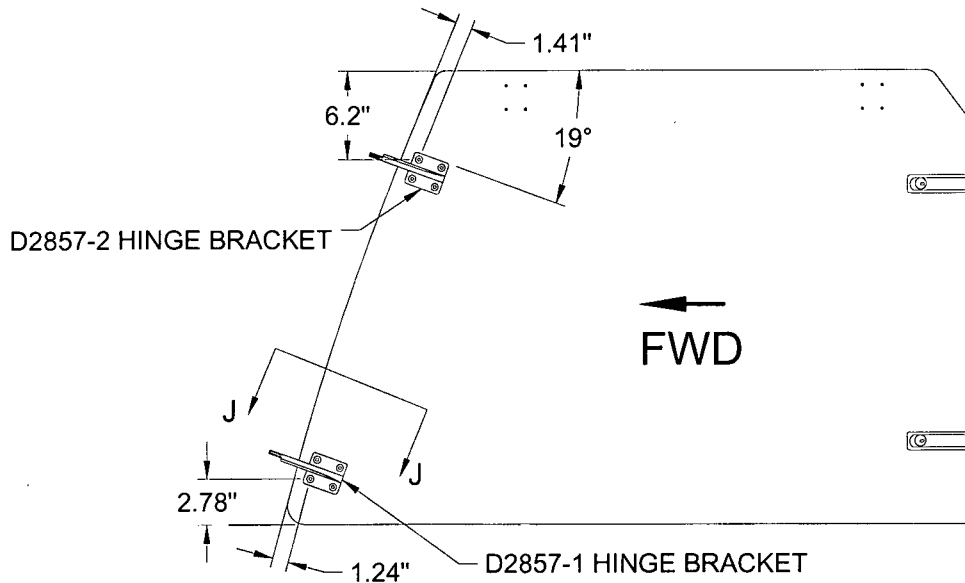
(a). HINGE BRACKET POSITION ON LH D3186-1 SPACEPOD DOOR
